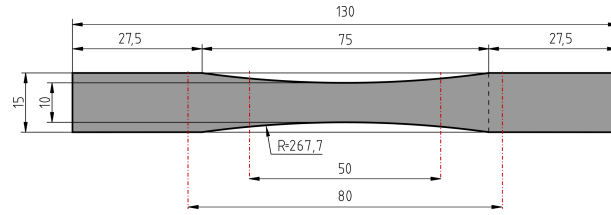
Flat Hourglass shaped specimen used for four-point bending tests (dimensions in mm) with initial cylinders contact position (red dash-dotted lines)
